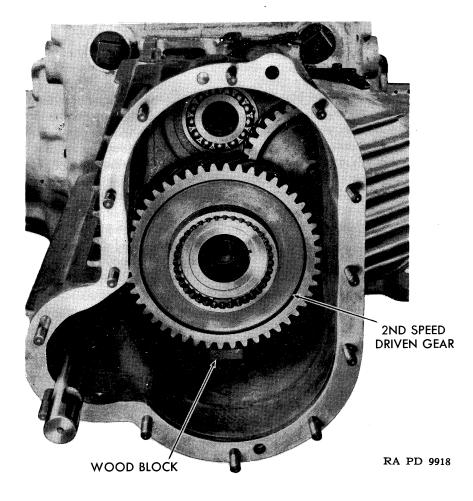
Second speed gear blocked to aline bore with shaft center bearing.
